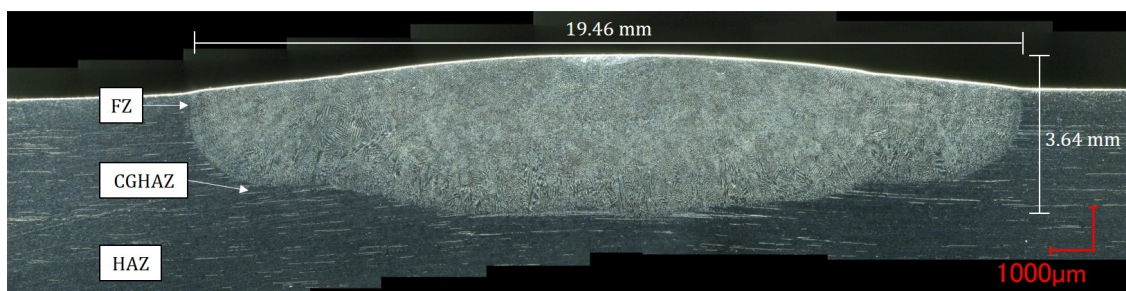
Geometry of the weld with different zones as observed by optical microscope of the cold-rolled and subsequently single-pass welded state.
